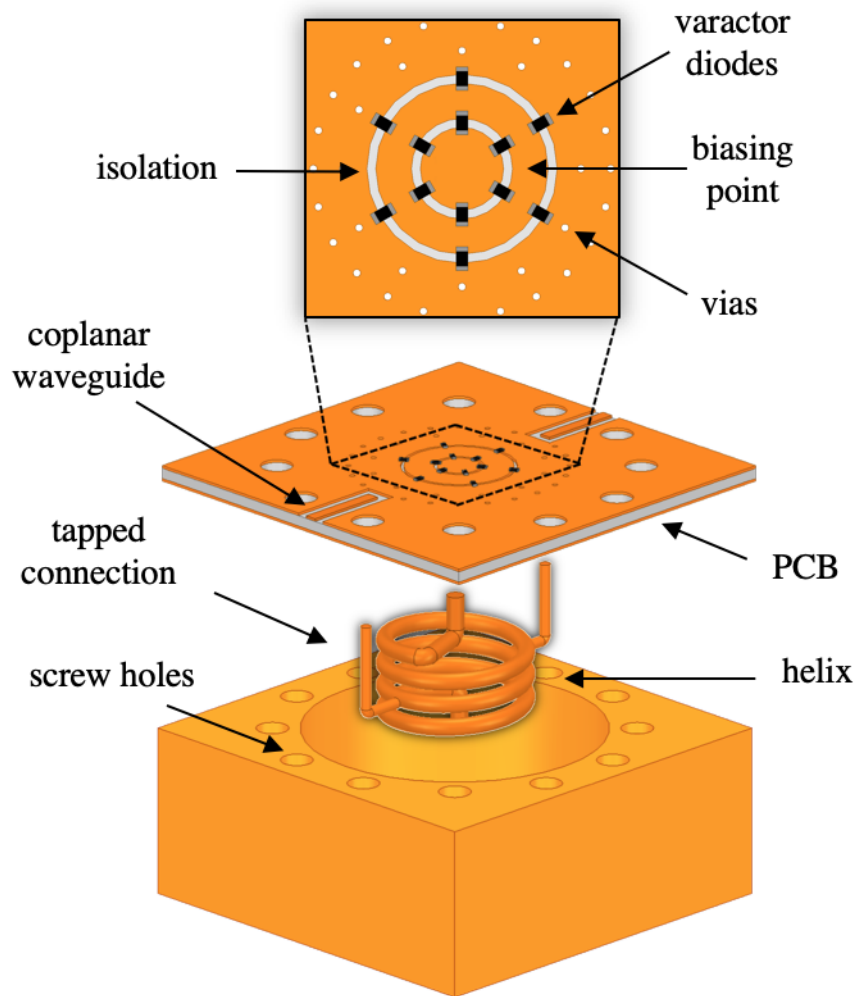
Exploded model of a highly miniaturized 3D-printed tunable helical resonator with varactor diodes mounted on the PCB.
